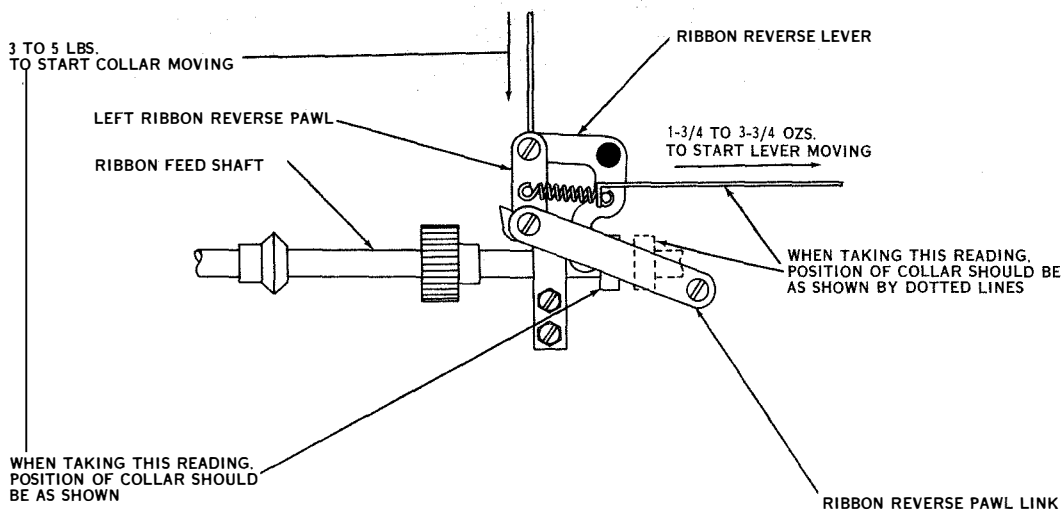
Ribbon Feed Shaft Safety Spring Compression and Reverse Pawl Spring Tension
